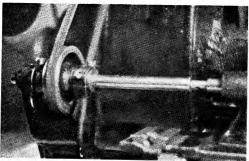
Boring the headstock bearing. The cutter of the boring bar can be seen just about to start the cut. Note small gap between pulley and left-hand bearing, as mentioned in the text
